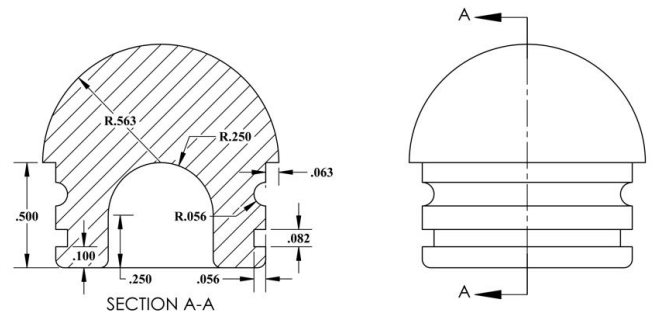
Dimension drawing of end-cap used in construction of 0.0254 m (1") inner diameter pressure housings.
